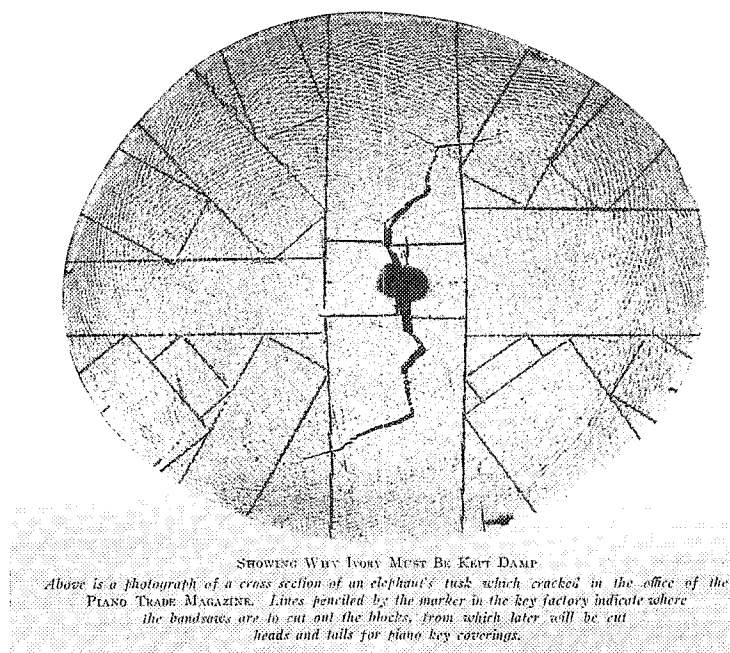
Tusk cross-section, showing interwoven Shreger lines, overlaid by blocking layout for piano key heads and tails. All face the center to minimize non-symmetrical grain. The fracture growing outward from the pulp cavity suggests that excessive drying occurred after blocking. From "The romance of the Ivory Piano Key," *Piano Trade Magazine*, March 1925, p. 62
